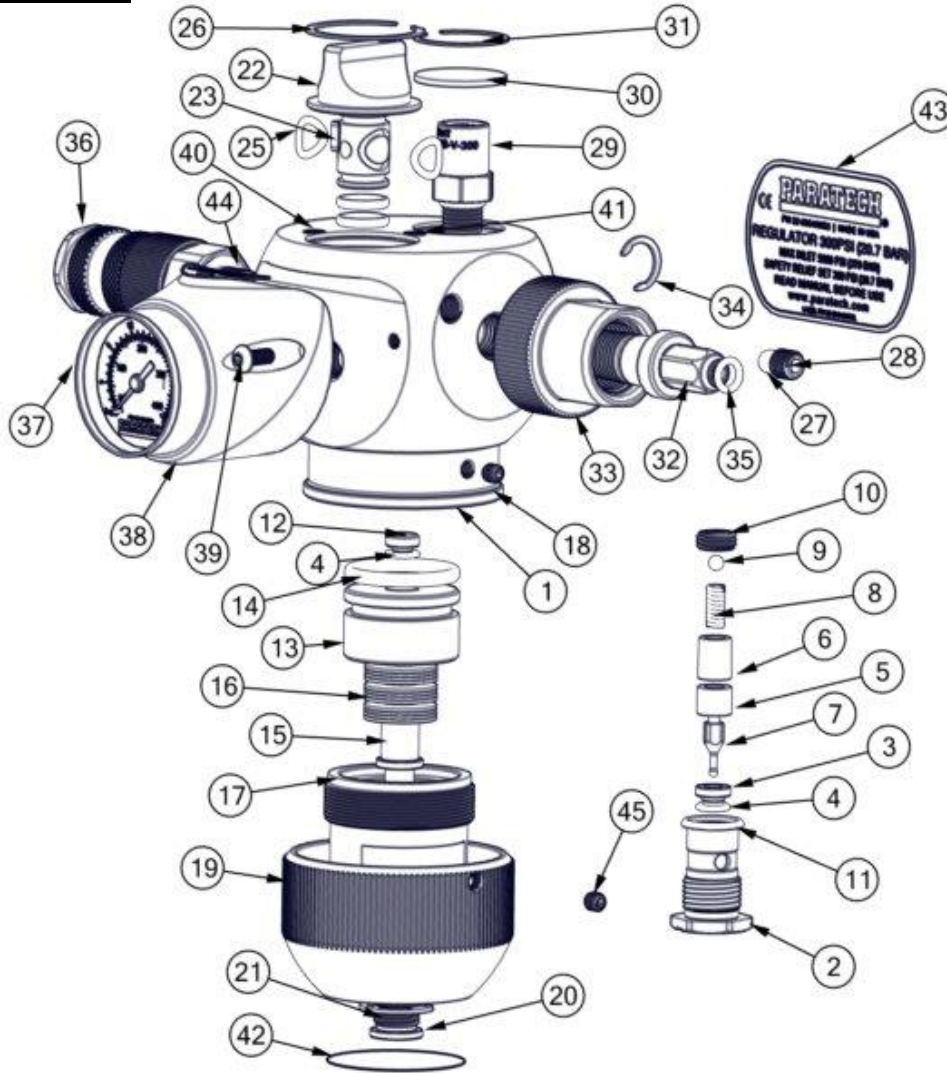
22-895400G3 Adjustable Pressure Regulator Exploded View
